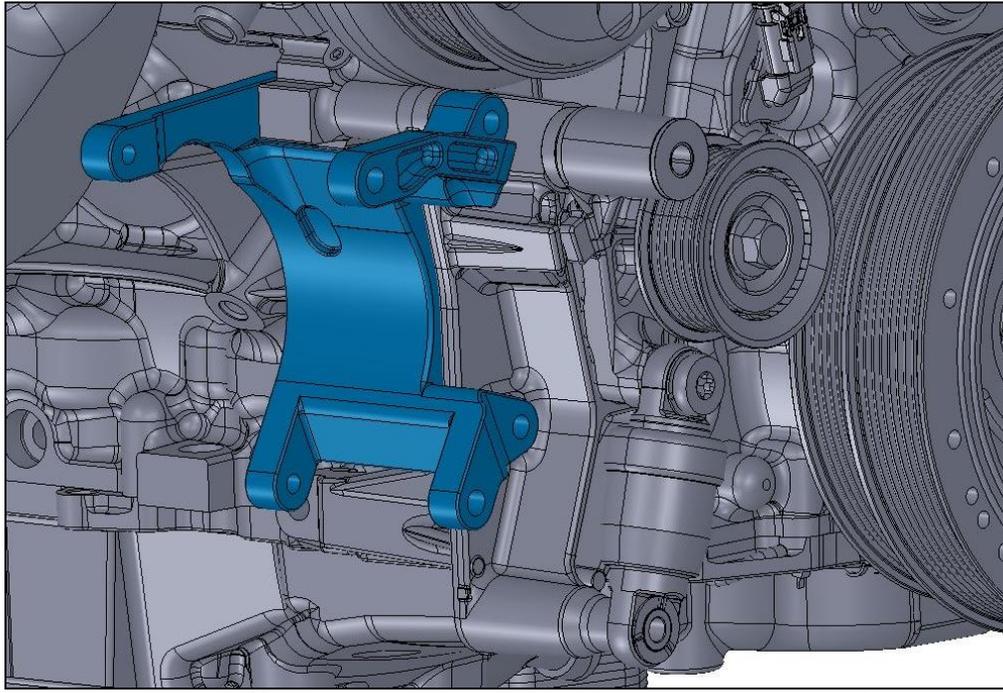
Previously installed A/C compressor and bolts are hidden for clarity of mounting location of the bracket to tensioner.
